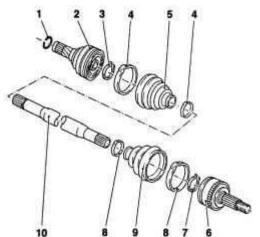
Drive shaft with constant velocity joints of double compensation: 1 - snap ring, 2 - inner CV Joints, 3 - internal locking ring joint; 4 - Mounting clamp, 5 - anthers, 6 - outer constant velocity joints; 7 - internal locking ring joint; 8 - Mounting clamp; 9 - anthers; 10 - drive shaft
